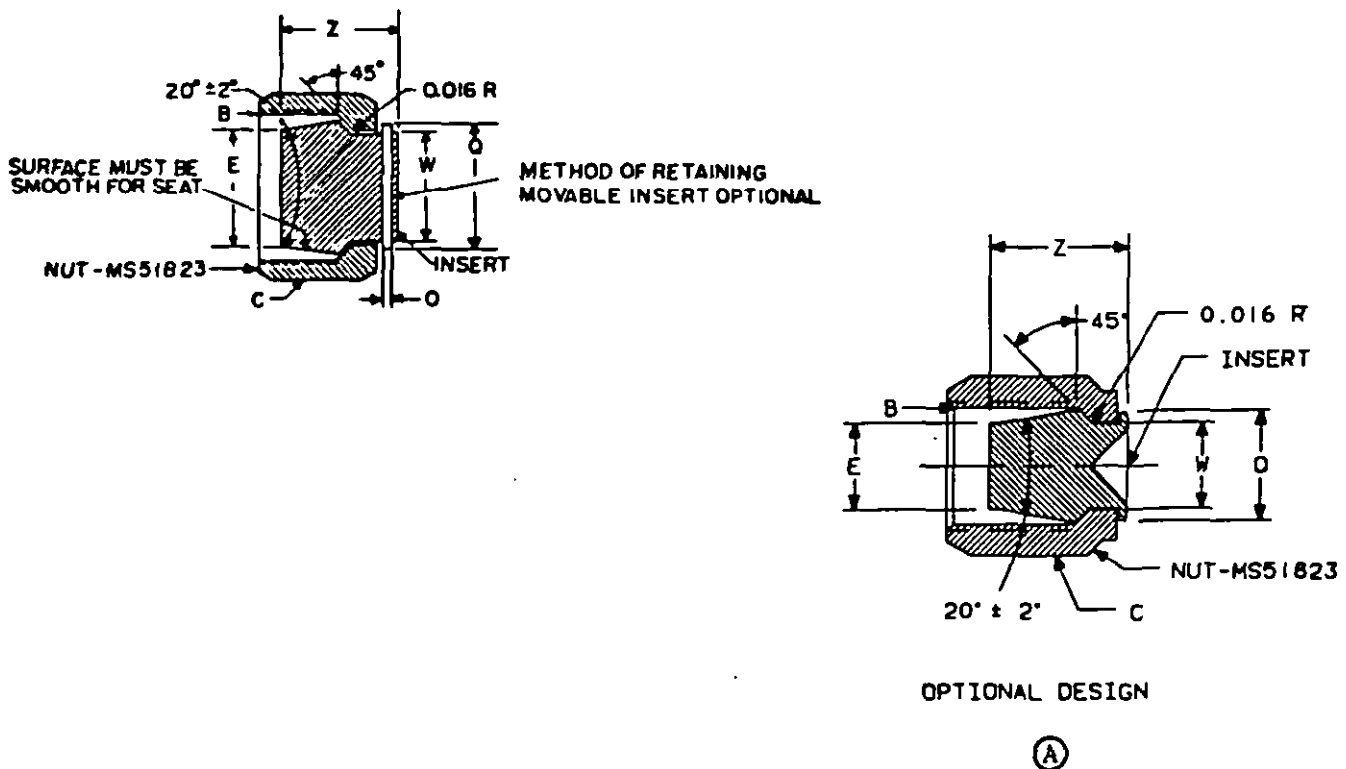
Cap Assembly, Tube, Flareless, Hydraulic.
